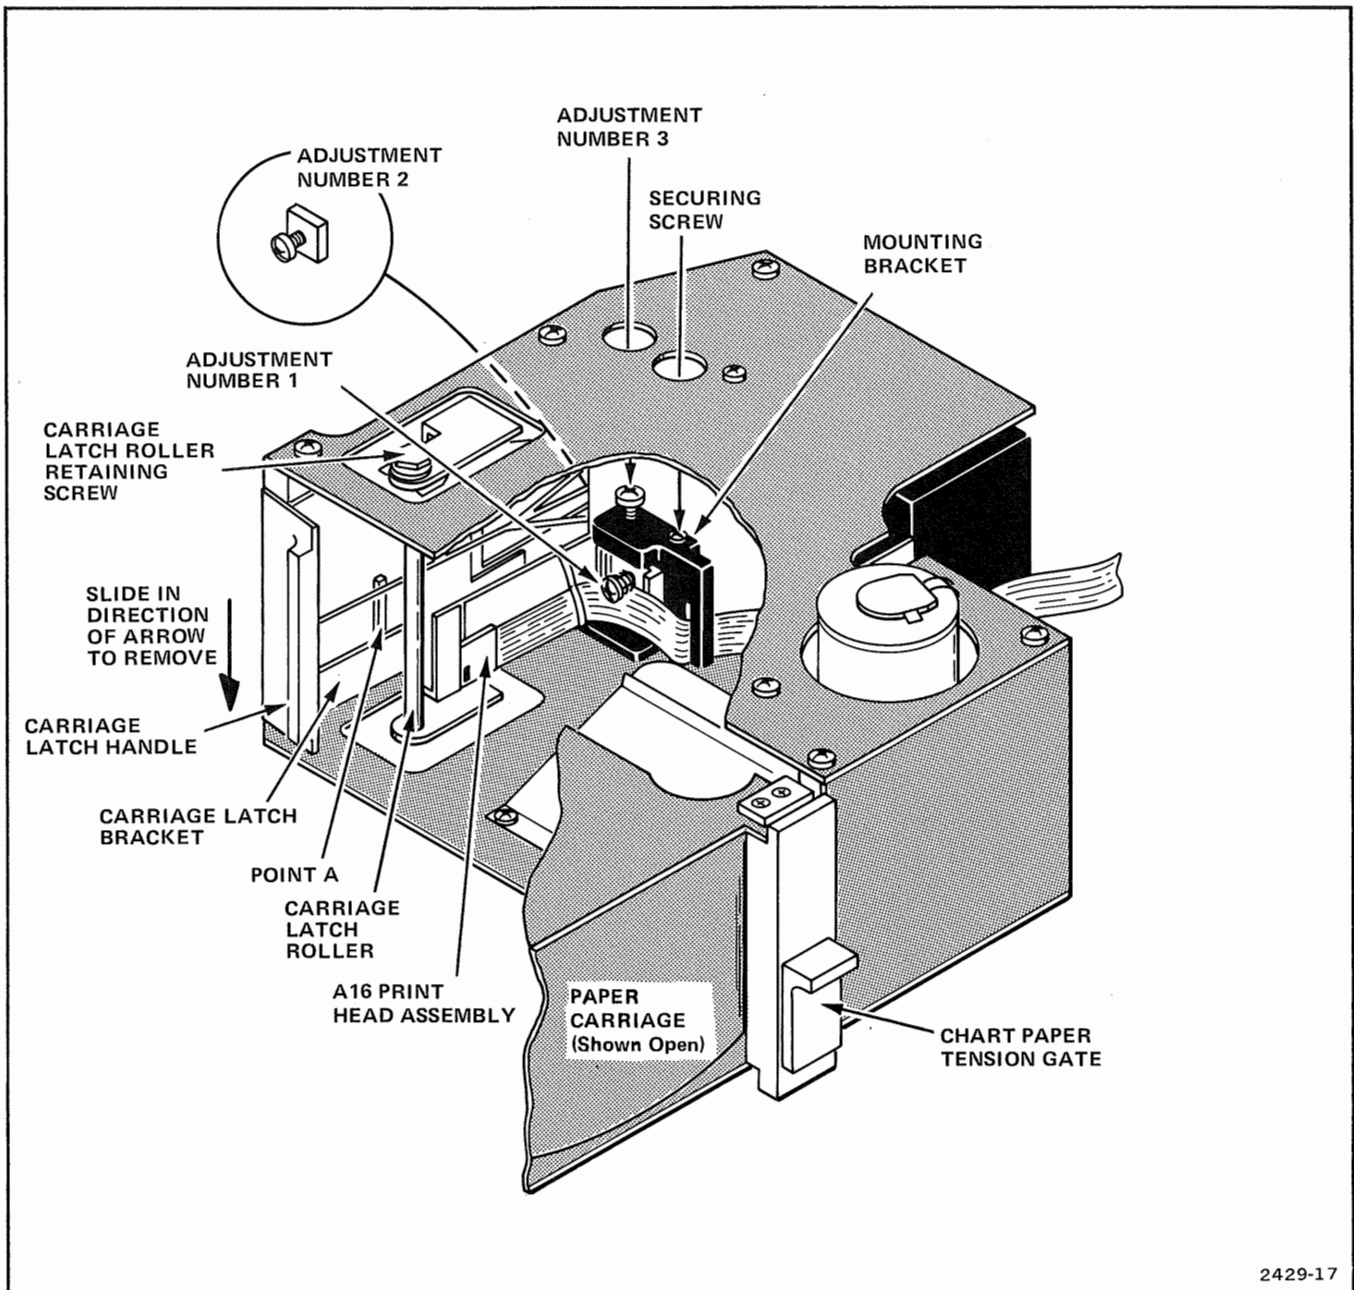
Location of securing screws and tension-adjusting screw for the Print Head Assembly.
